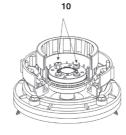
G – Disassembly of the drive magnetic assembly
